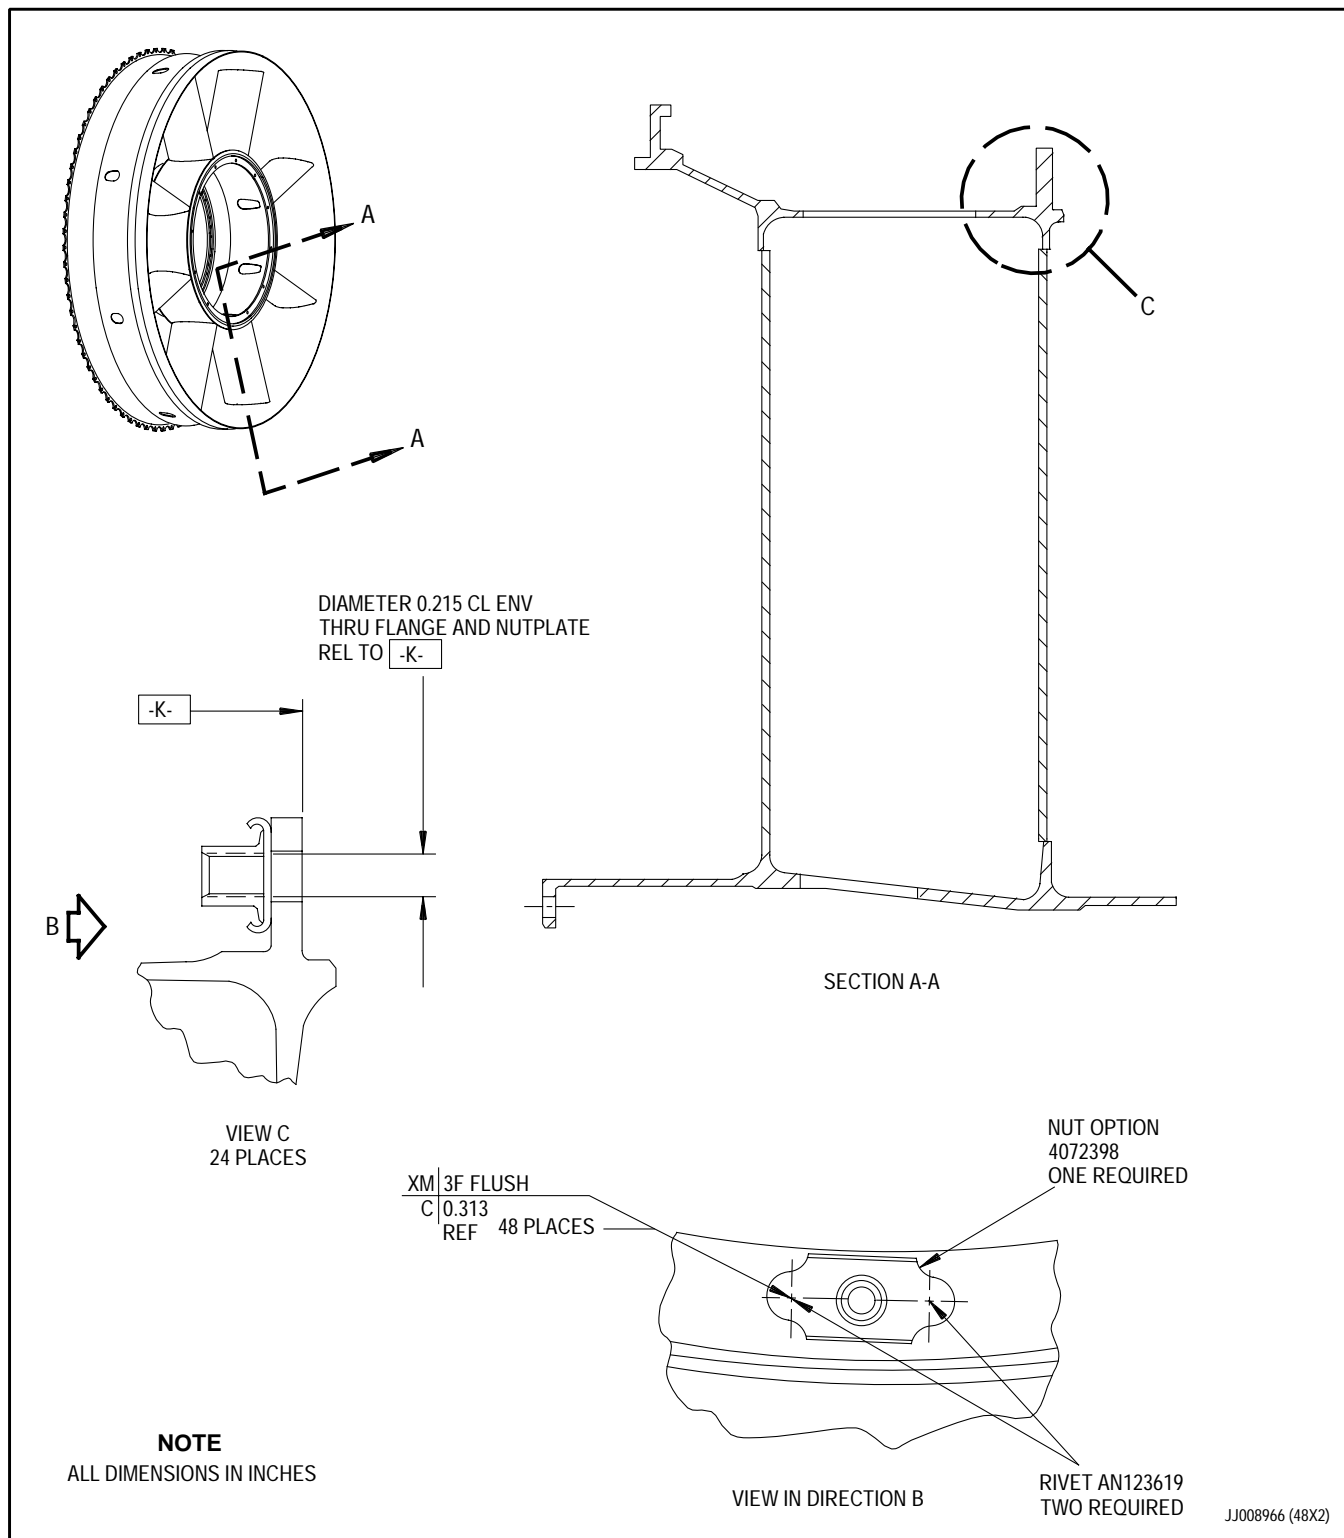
Turbine Exhaust Case Assembly - Nut Plate Replacement
